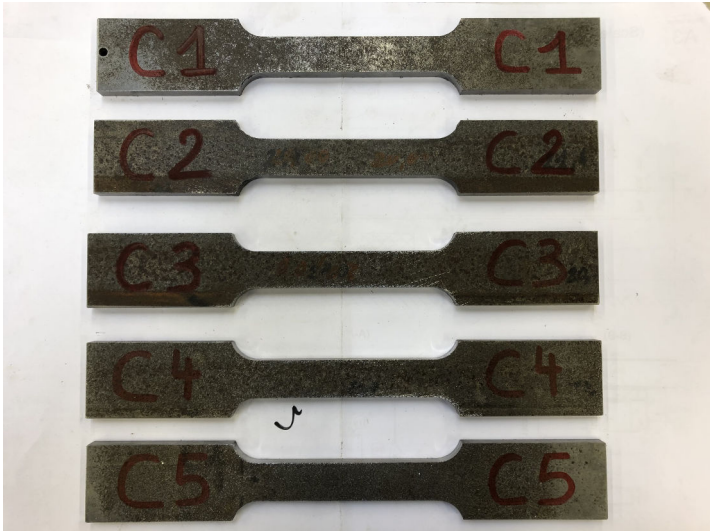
Tensile specimens of the central plate (C1 to C5)
